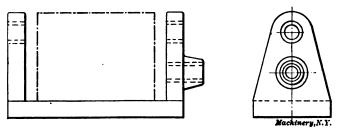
Boring Jig in which One Bar has Single and One Double Bearing
